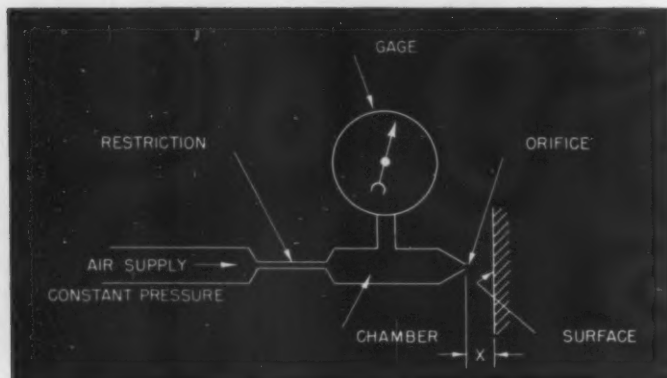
In this type of conventional air gaging, the back pressure developed in chamber is a function of dimension (X).
